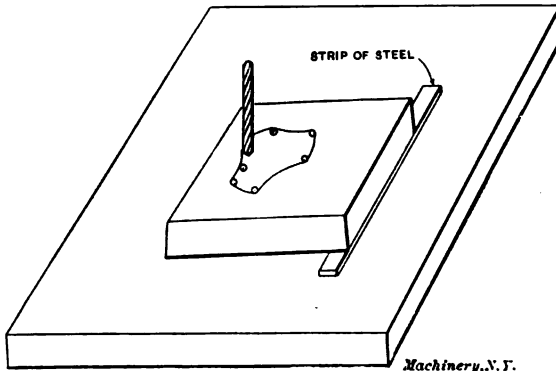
Method of Obtaining Clearance when Drilling out the "Core"
